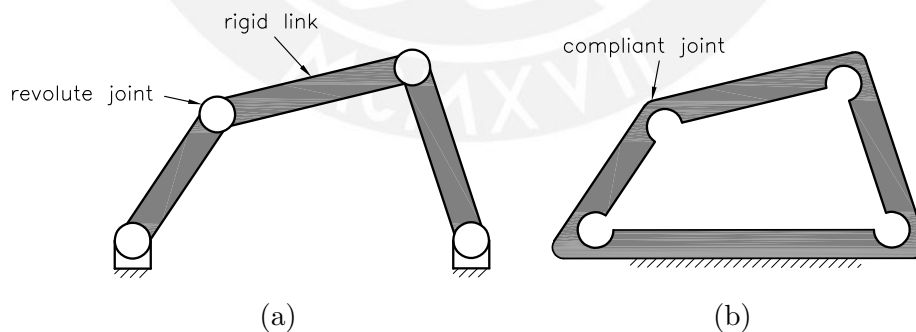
(a) Mechanism with conventional revolute joints; (b) Mechanism with compliant joints. Adapted from [10].
